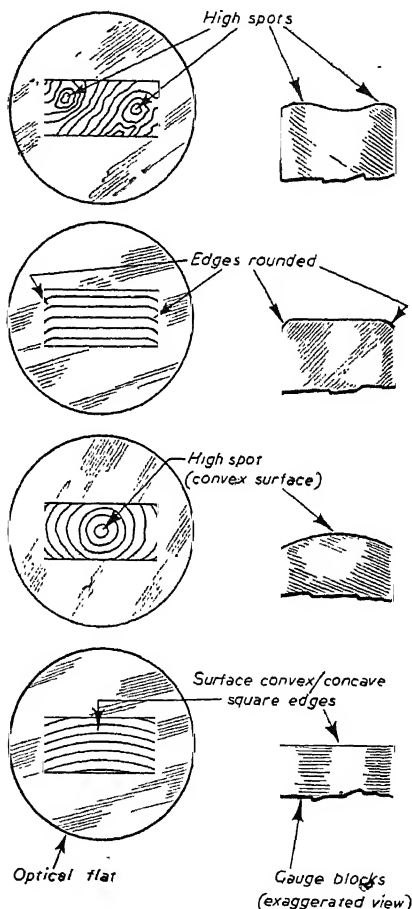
Checking surface flatness on slips or gauge blocks.
